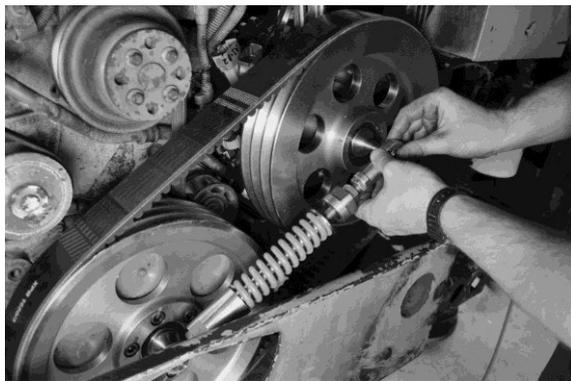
The belt-drive is spring tensioned to prevent the hybrid system from imposing any additional radial loads on the engine crankshaft.
